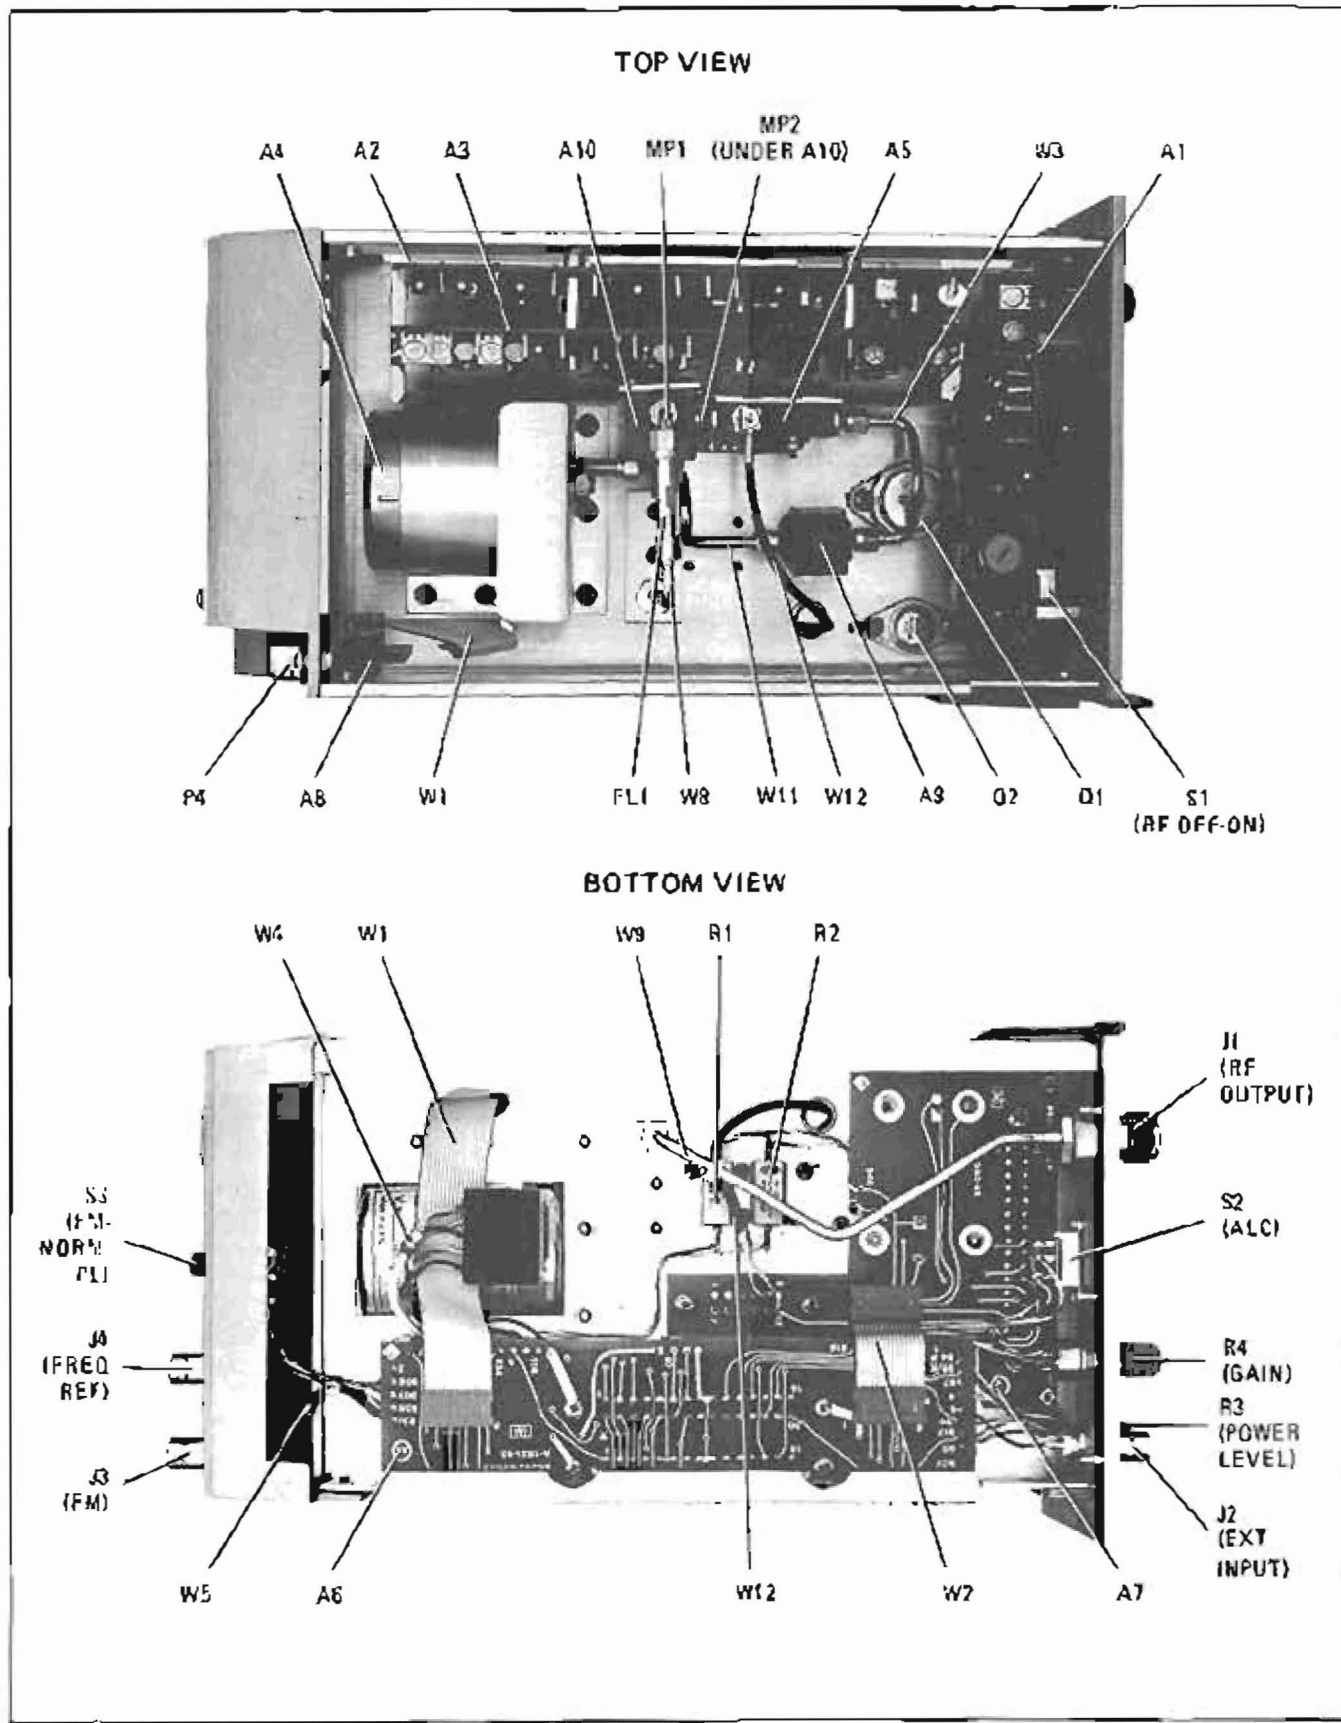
Major Assembly and Component Location, 8624D/86250D
